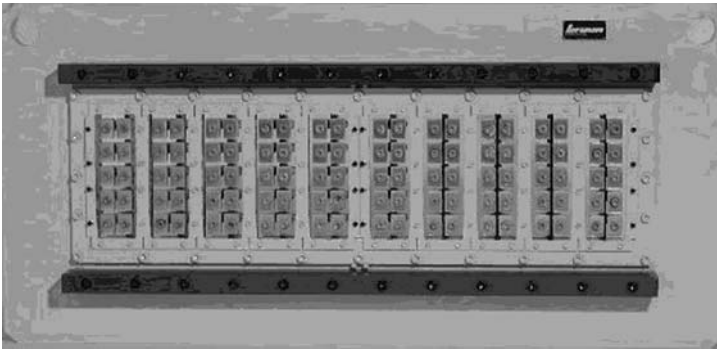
Combination pressure head and die assembly for the manufacture of multiple-column horizontal-coring clay bricks
